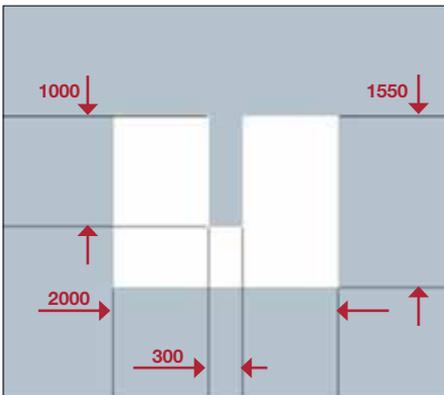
Schematic of stainless steel AISI 302 actuator style arms, dimensions in μm , laser machined out of sheet 50 or 75 μm thick
